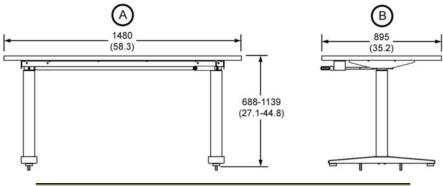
PARC4 Reconstruction Cabinet Dimensions
